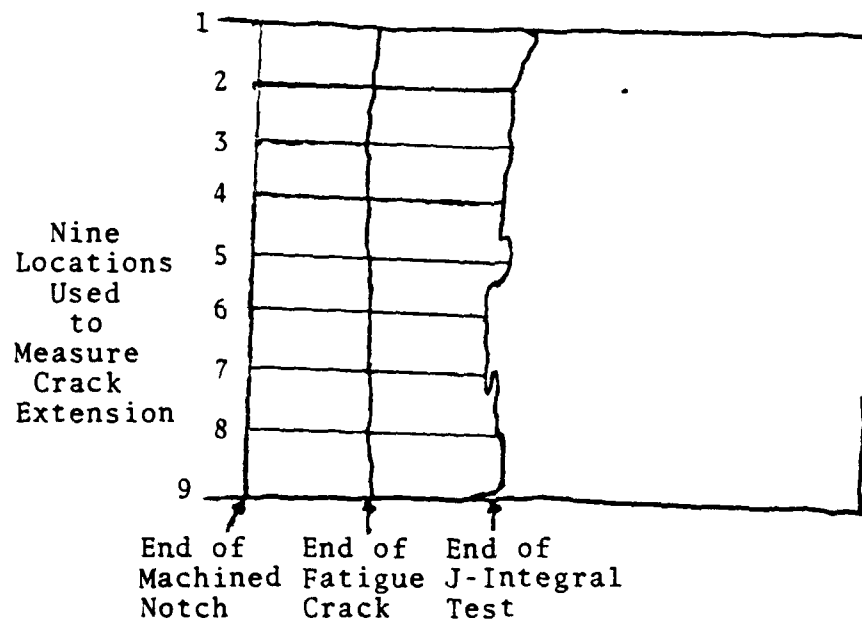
Tracing of HY80-5B Fracture Surface
